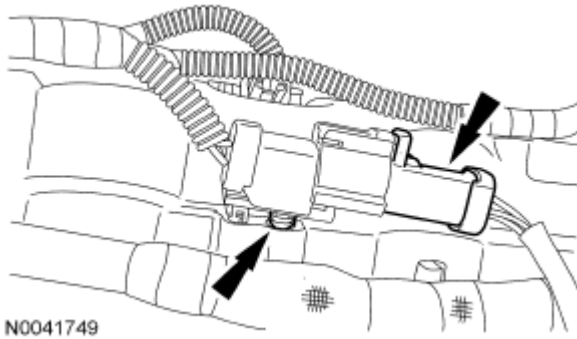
Locating LH Heated Oxygen Sensor Electrical Connector And Pin-Type Retainer
